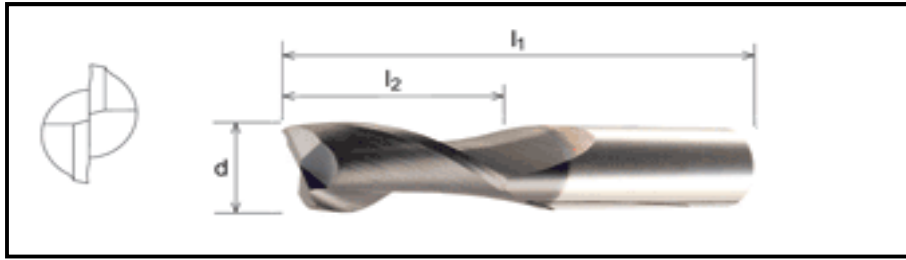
Somta Carbide End Mills – 2 Flute – Long Series
